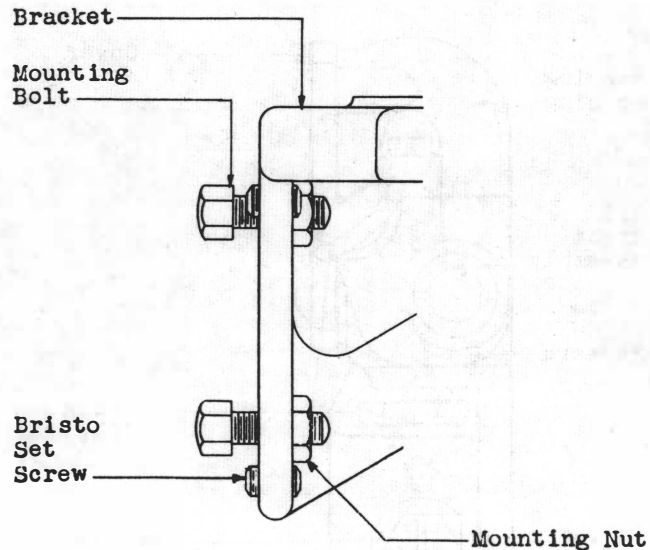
Bracket Mounting Bolts and Adjusting Screws
